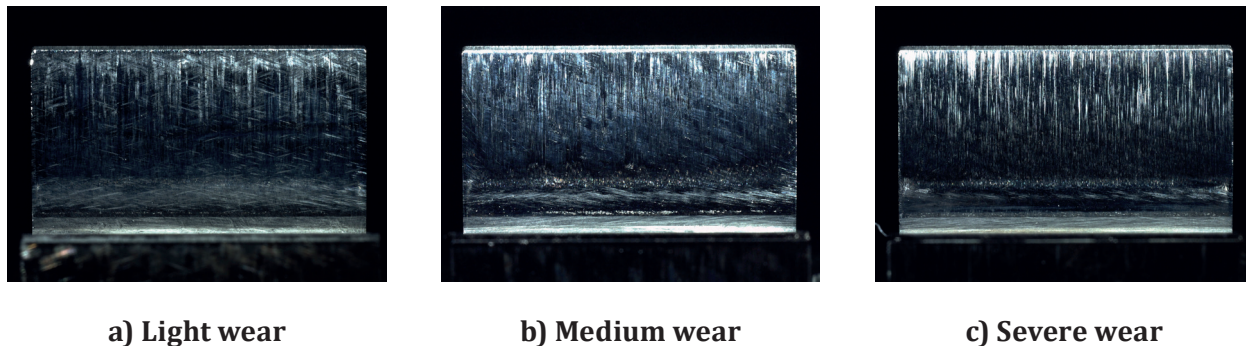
FZG A-type gear tooth flank changes due to continuous wear
